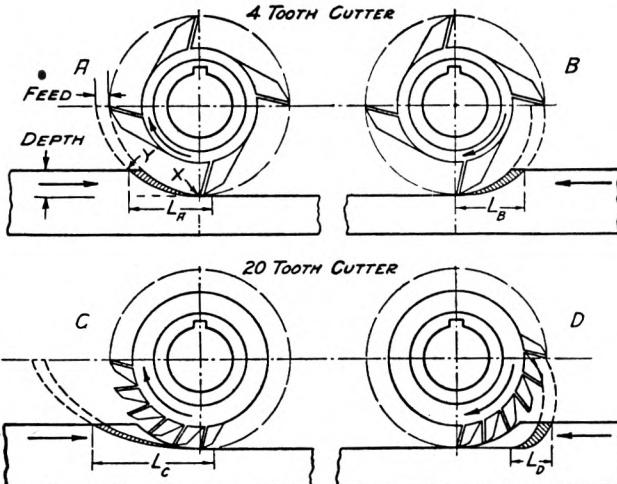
GRAPHICAL ANALYSIS OF CHIP FORMATION WHEN MILLING UP AND MILLING DOWN WITH COARSE- AND FINE-TOOTH CUTTERS (With thick chips removed more efficiently, from a power standpoint, than thin chips, it is seen that the 4-tooth cutter is more efficient when cutting down at B than when cutting up. It is seen, also, that the fine-tooth cutter is more efficient when cutting down at D than when cutting up. Further, it is seen that the fine-tooth cutter when cutting down is more efficient than the coarse-tooth cutter when cutting down, the feed per tooth in all cases being the same.)
